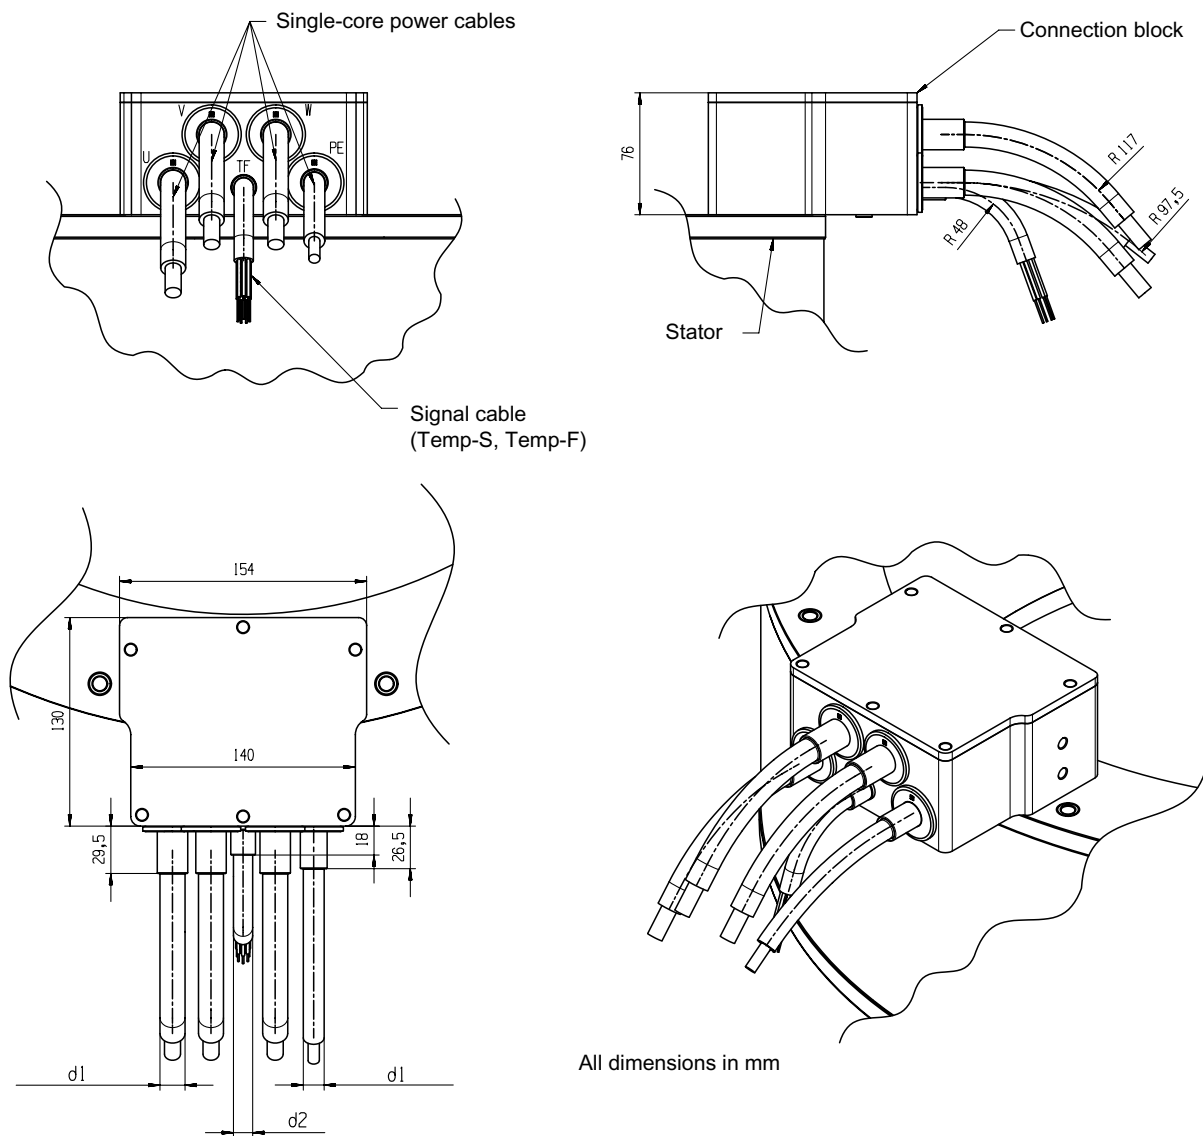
Radial electrical connection towards the outside with sleeve and single core for 1FW6290, 35 mm² core cross-section
